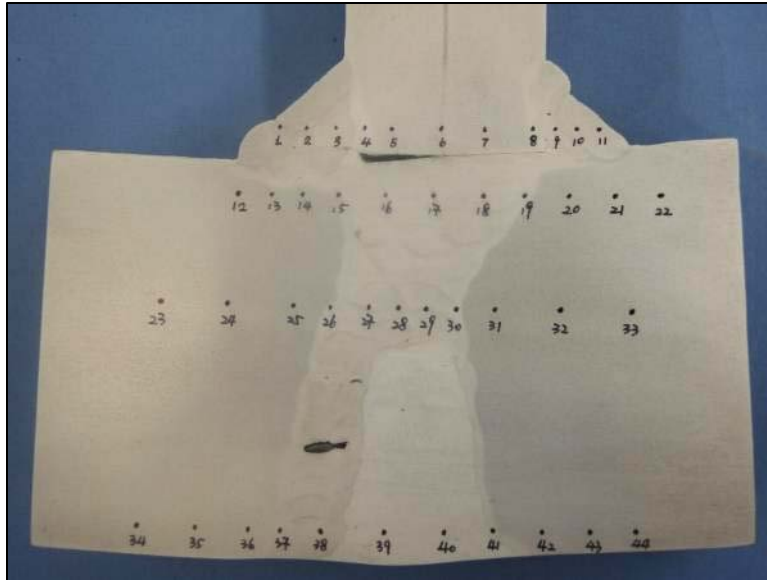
Cross-section specimen from girder section E.6-N showing etched weld profiles and Rockwell B hardness measurement locations.
